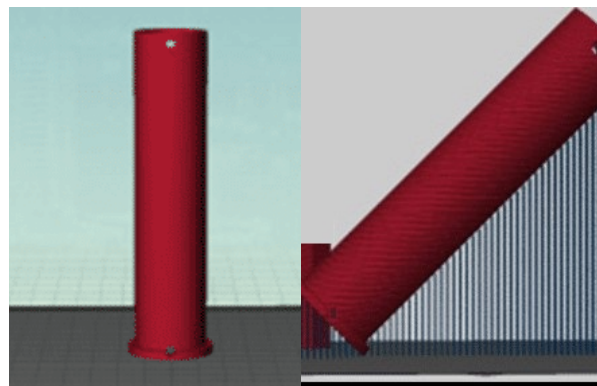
Workpiece on left printed in horizontal plane, workpiece on right using support material and tilted print plane (Adapted from 3DLAB, 2020).
